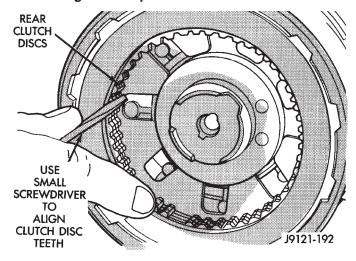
Aligning Rear Clutch Disc Lugs and install assembly in driving shell. Be sure output shaft thrust washer and thrust plate are not displaced during installation.
